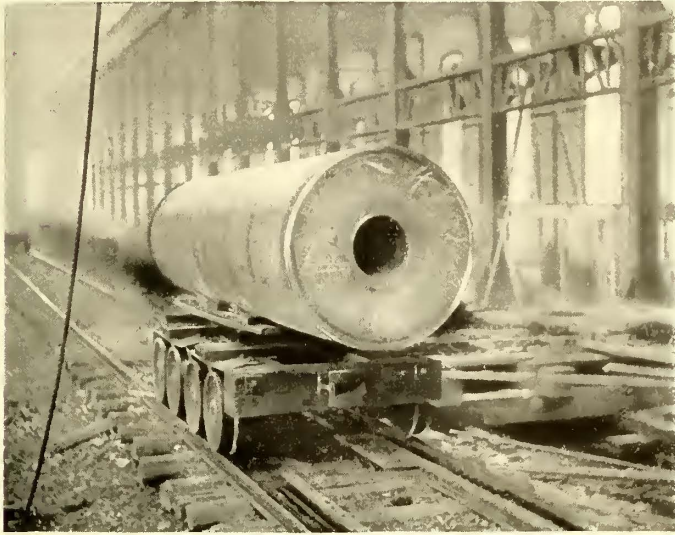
TRANSPORTING A HOLLOW FORGING.
